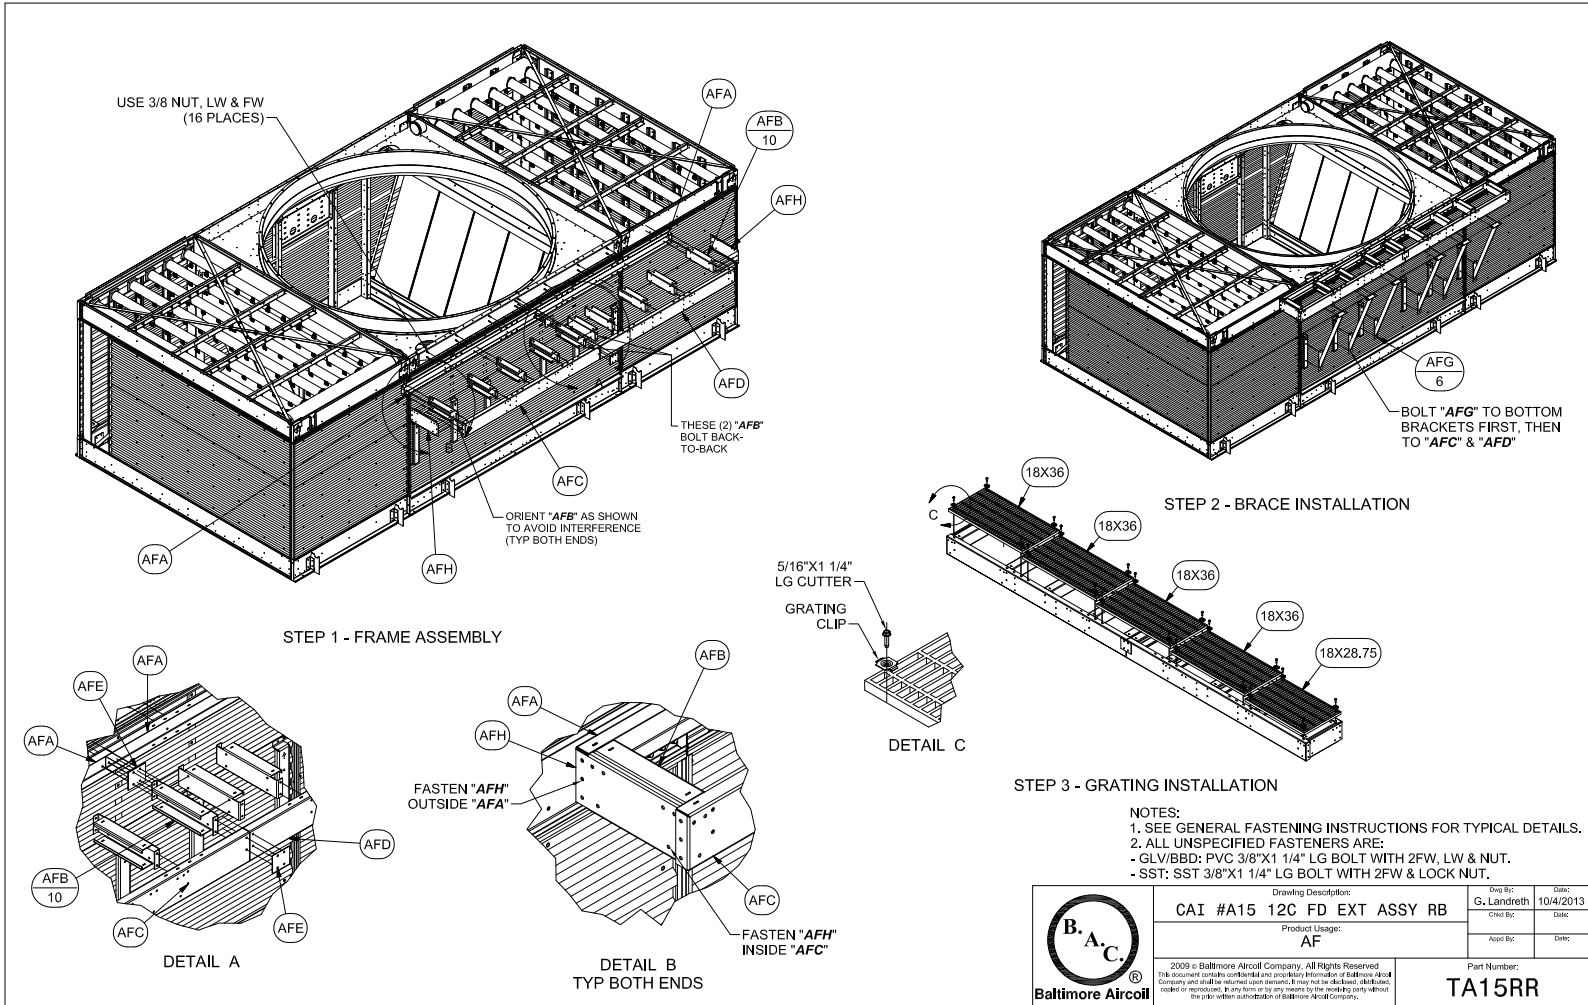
TA15RR Fan Deck Extension Installation 12' Units
